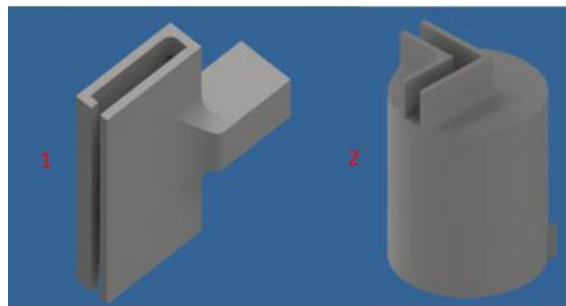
CAD drawings of the parts that were used to evaluate the Y-axis motion.
